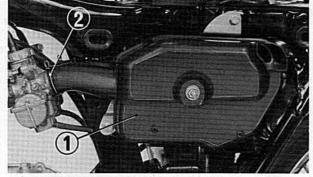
(1) Air cleaner assembly (2) Hose clip
